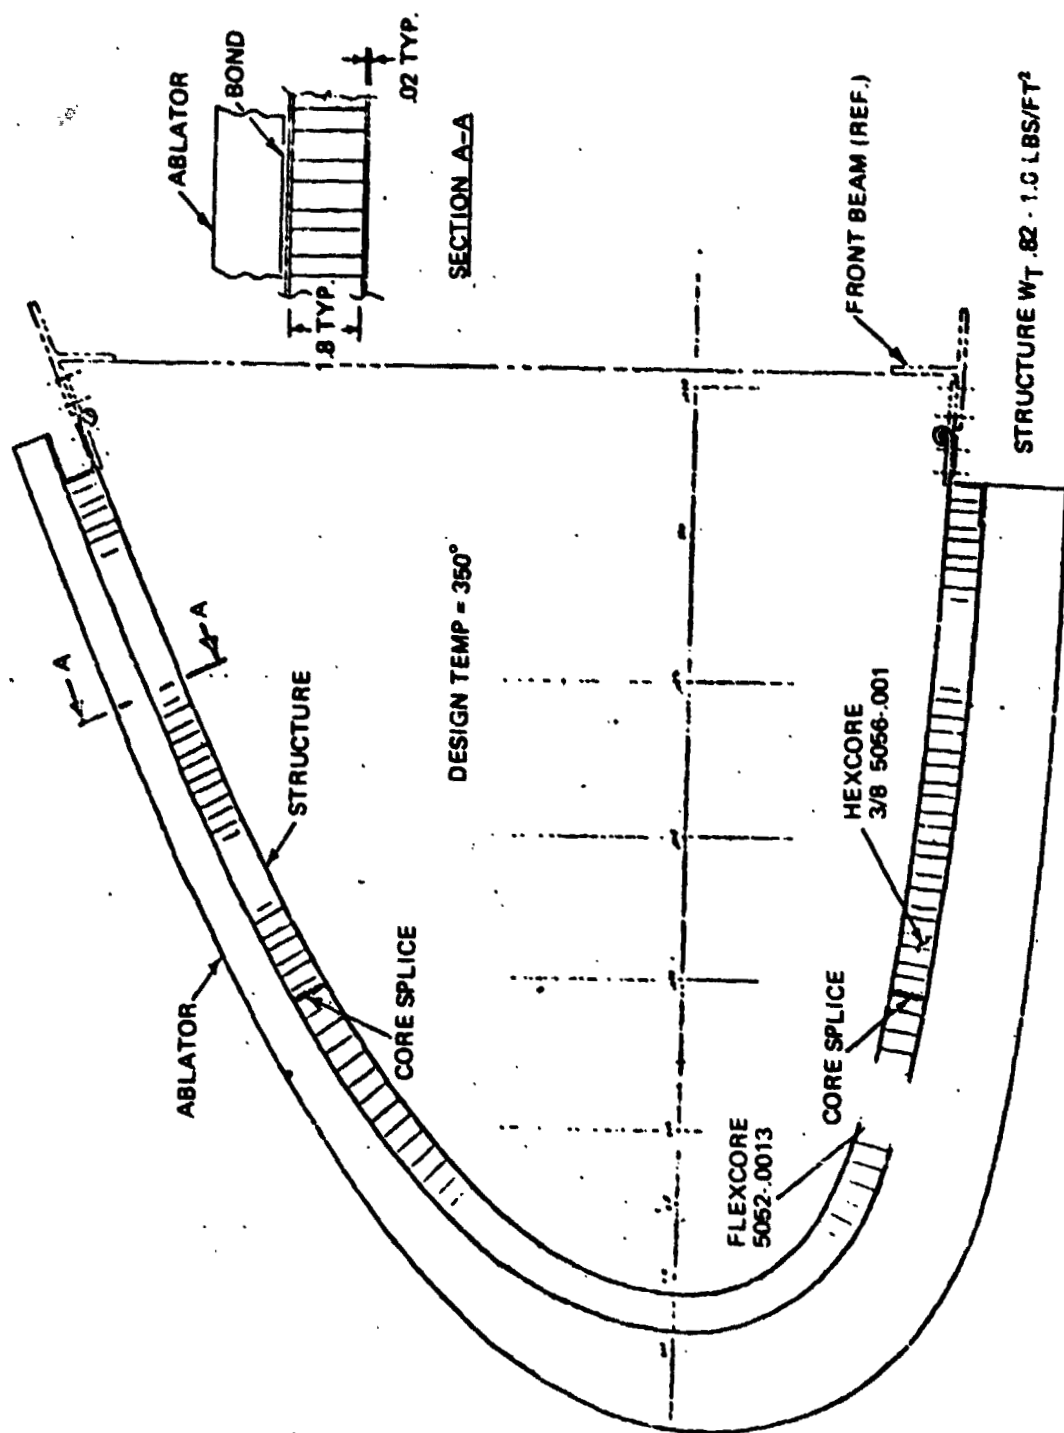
L.E. Structure Designs: AI. Sandwich L.E. Structure
